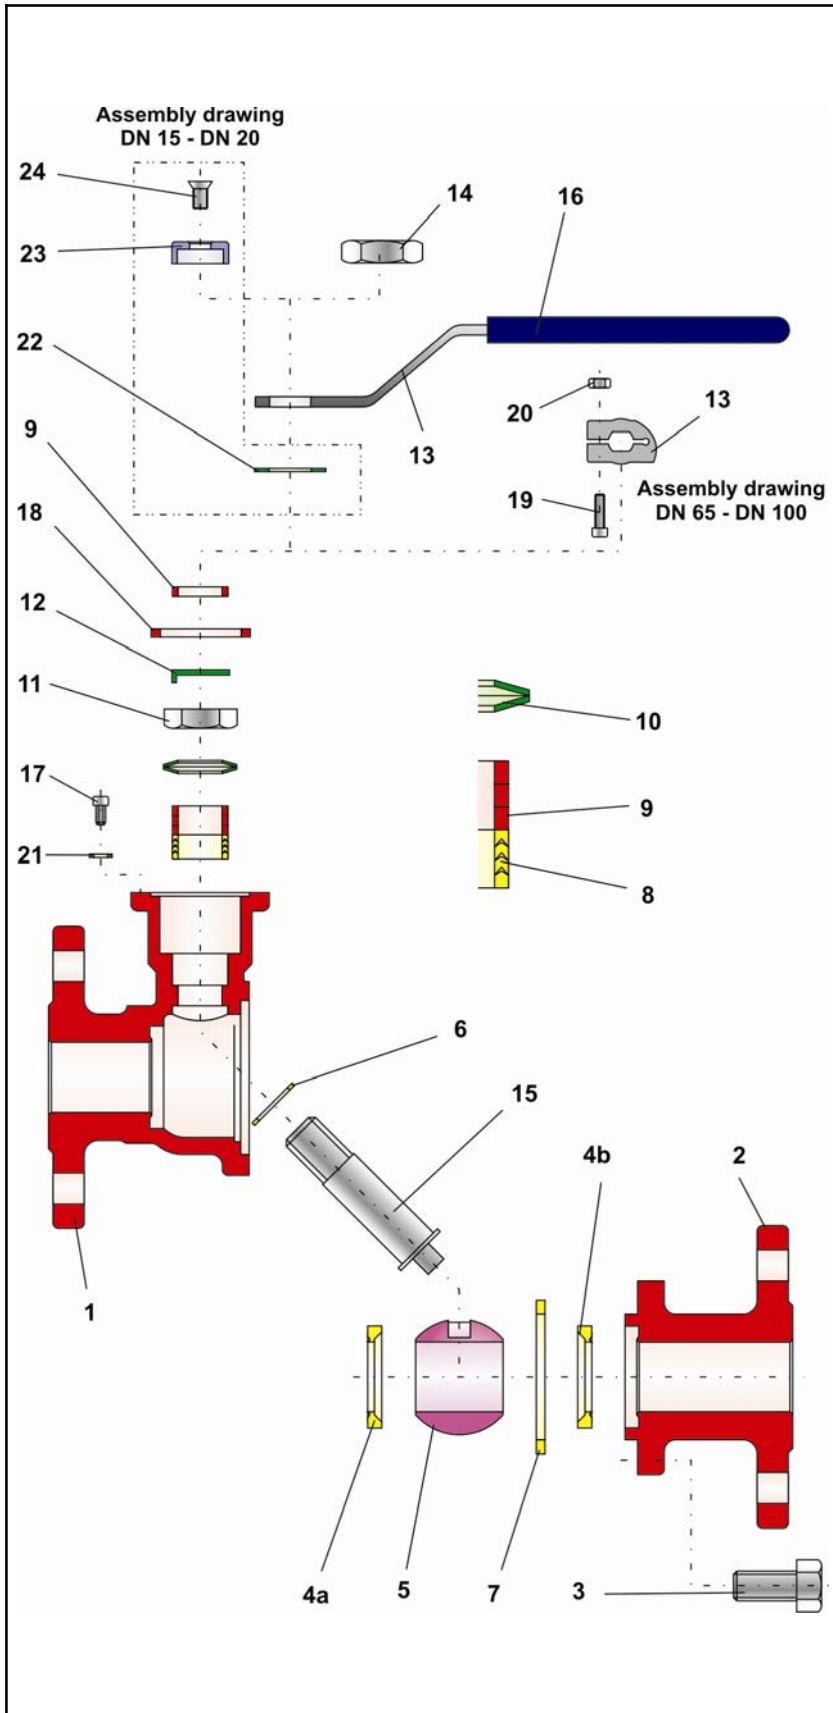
Detail drawing of Series 26d-Type C Ball Valve
